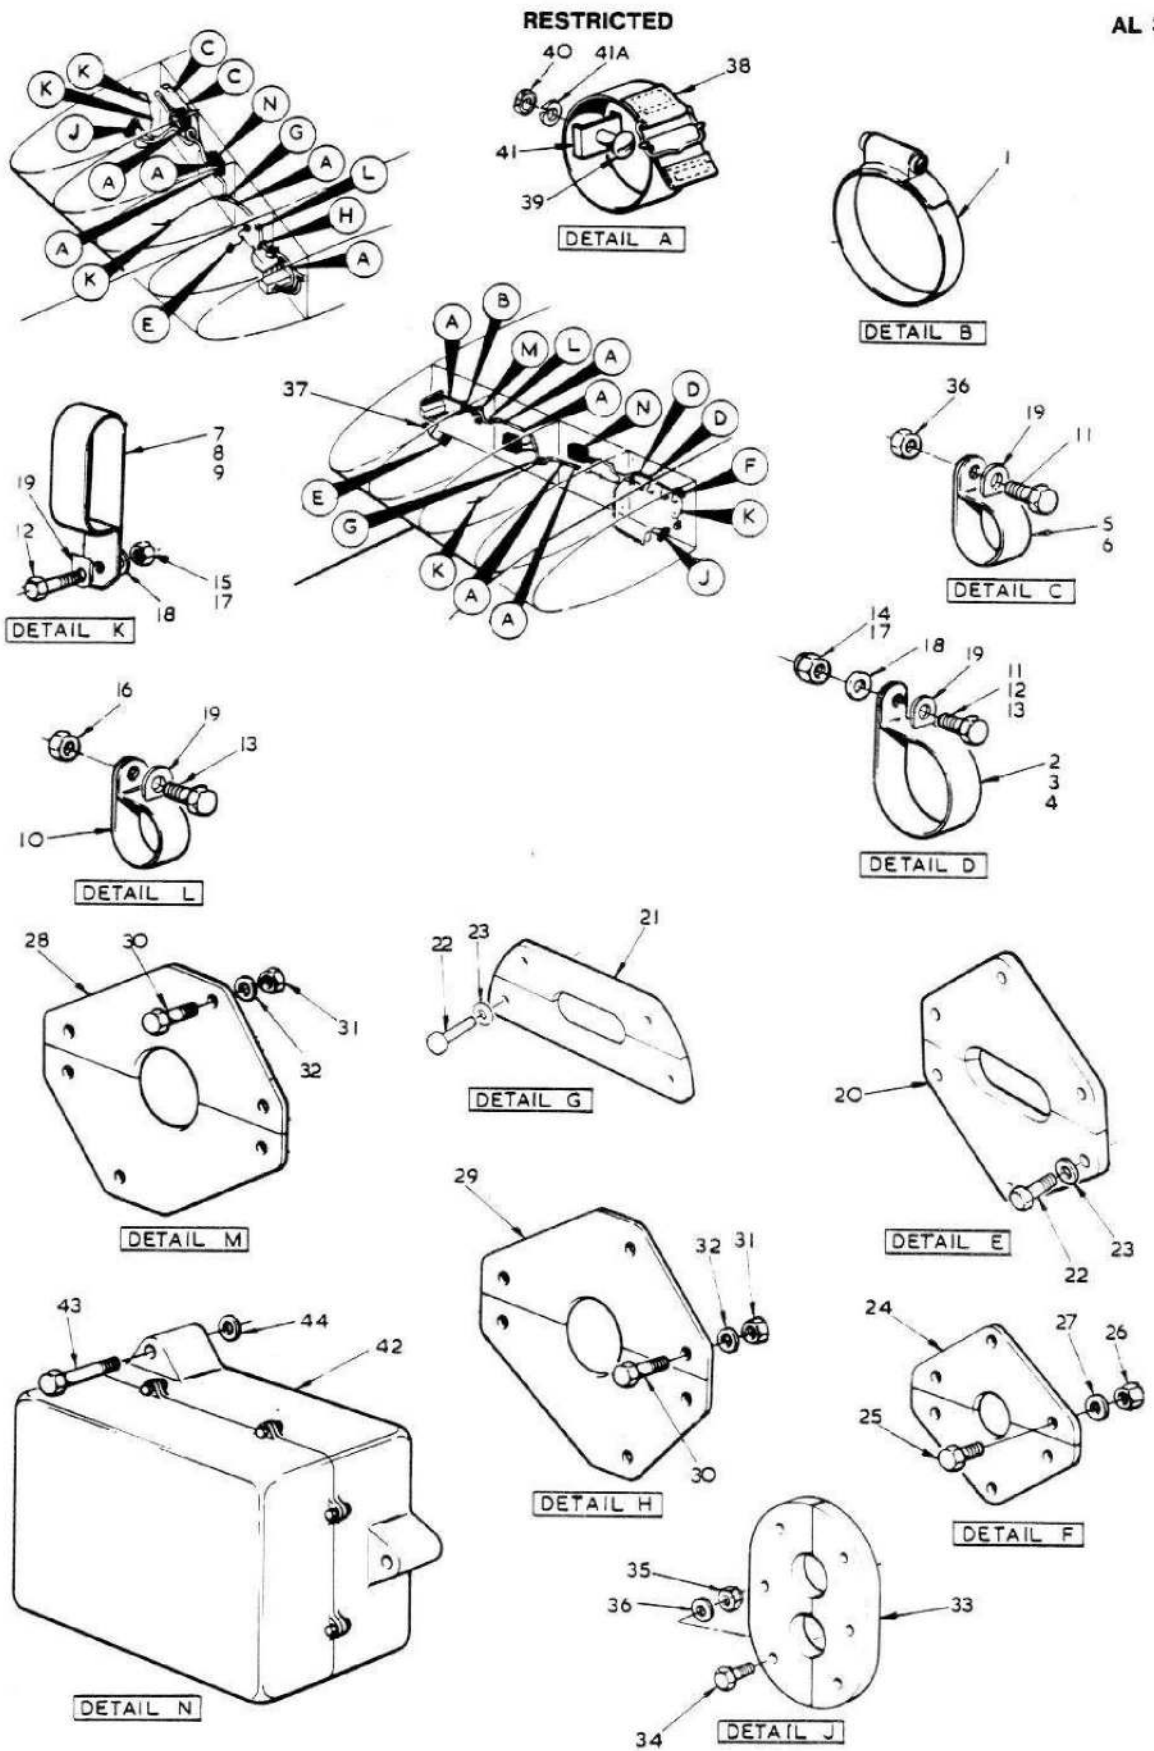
ELECTRICAL EQUIPMENT IN WINGS
